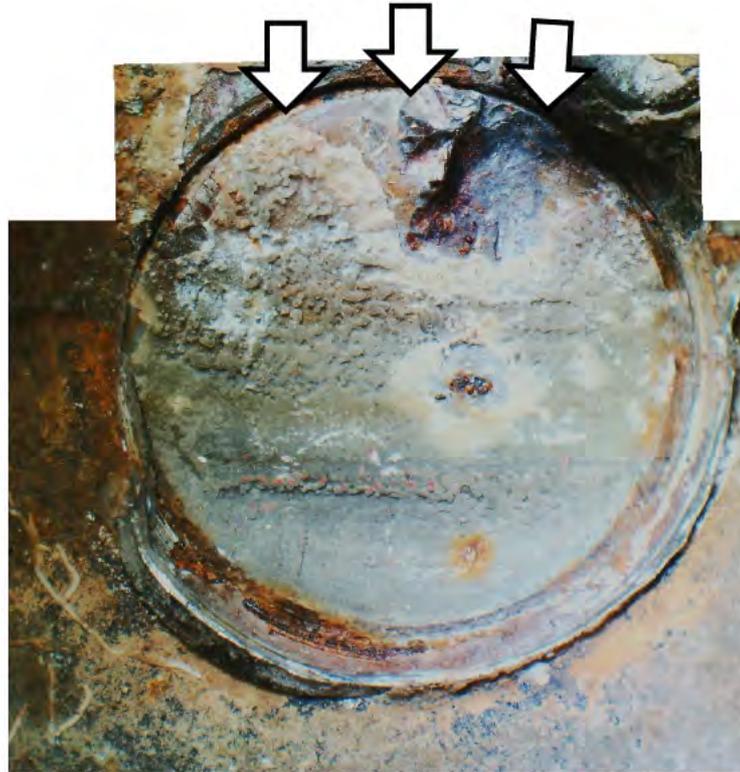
Montage of macroscopic images recorded of Rod 11 fracture. Origins marked with an arrow. Surface very corroded.
